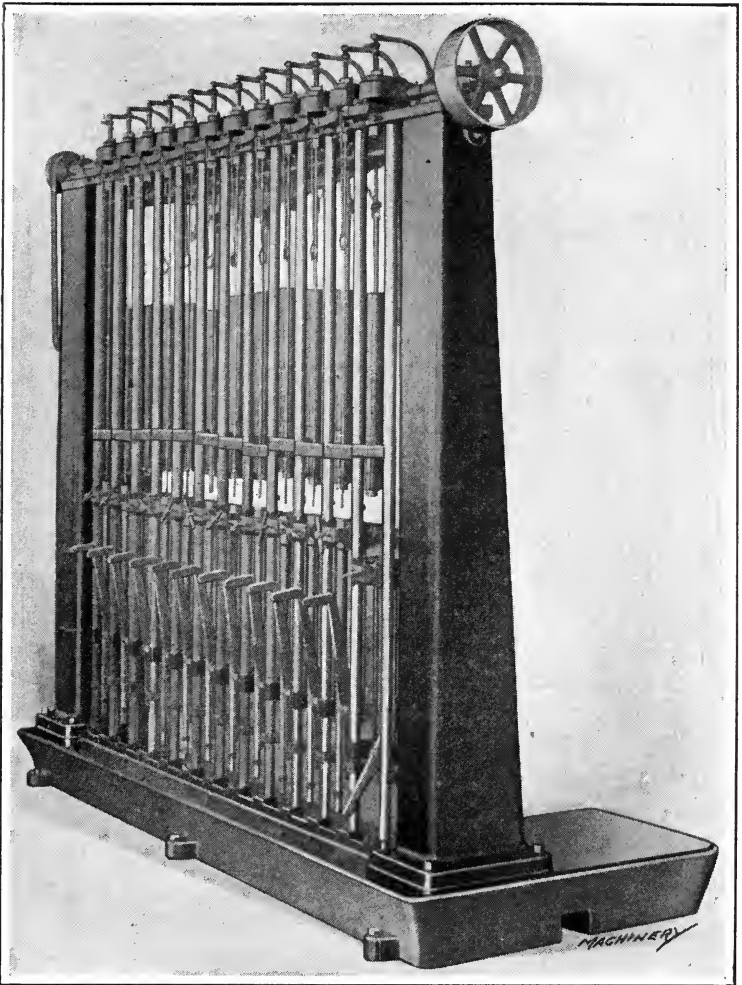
Westinghouse Twelve-spindle Rifle Barrel Reaming Machine
